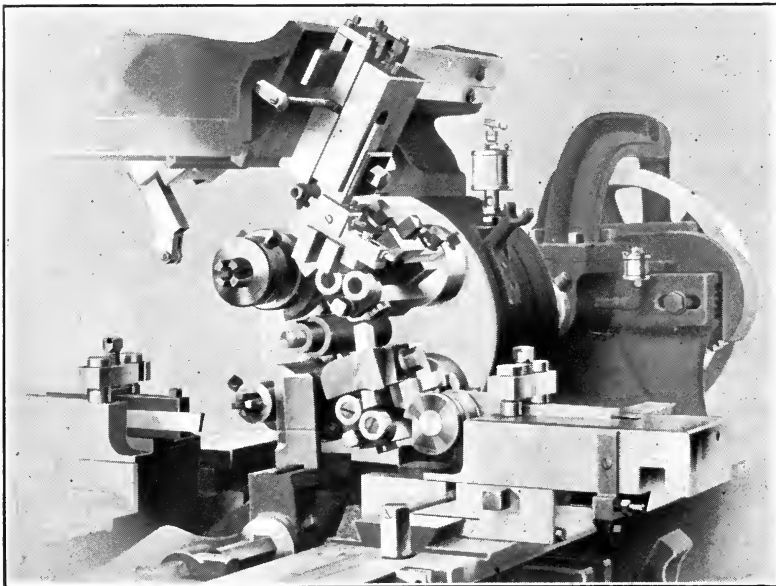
Arrangement of tools in multiple spindle automatic turret lathe.
